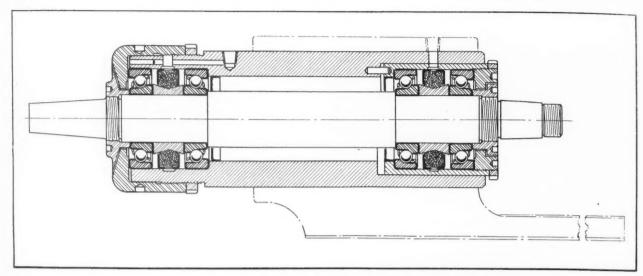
Grinding Spindle Equipped with Four-bearing Mounting
